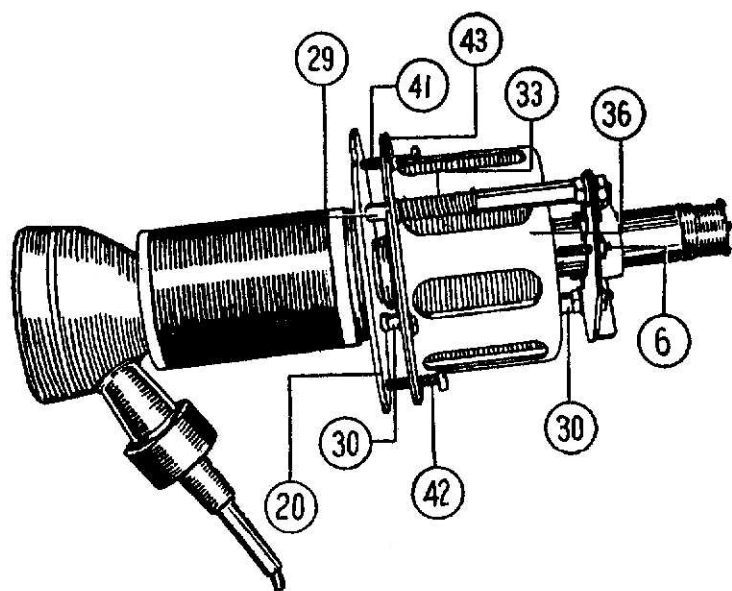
MECHANICAL ADJUSTMENT OF CENTRING
